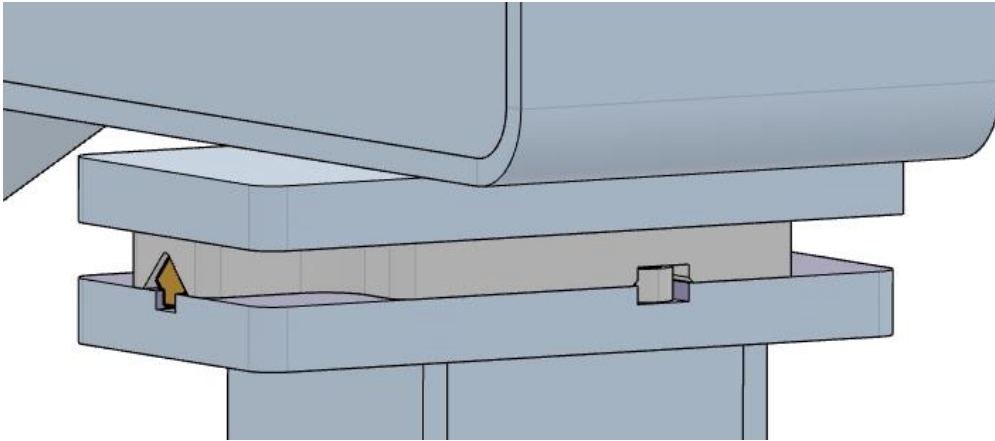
The detachable plate and keys assembled with arm and bracket
